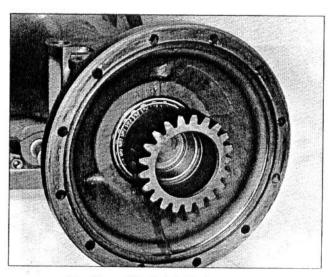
A - "Cup" Axle Shaft in Position (Narrow Ring Gear - Narrow Drive Cover)
